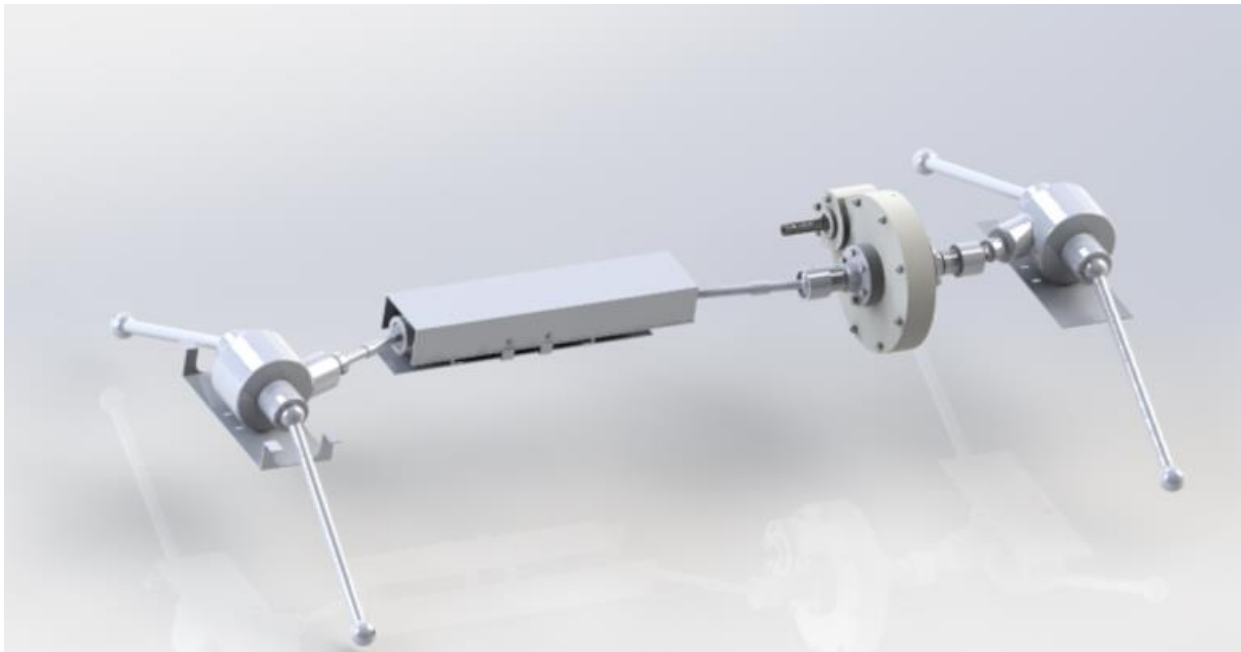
Engine/Gearbox Mounting Fixture Model
